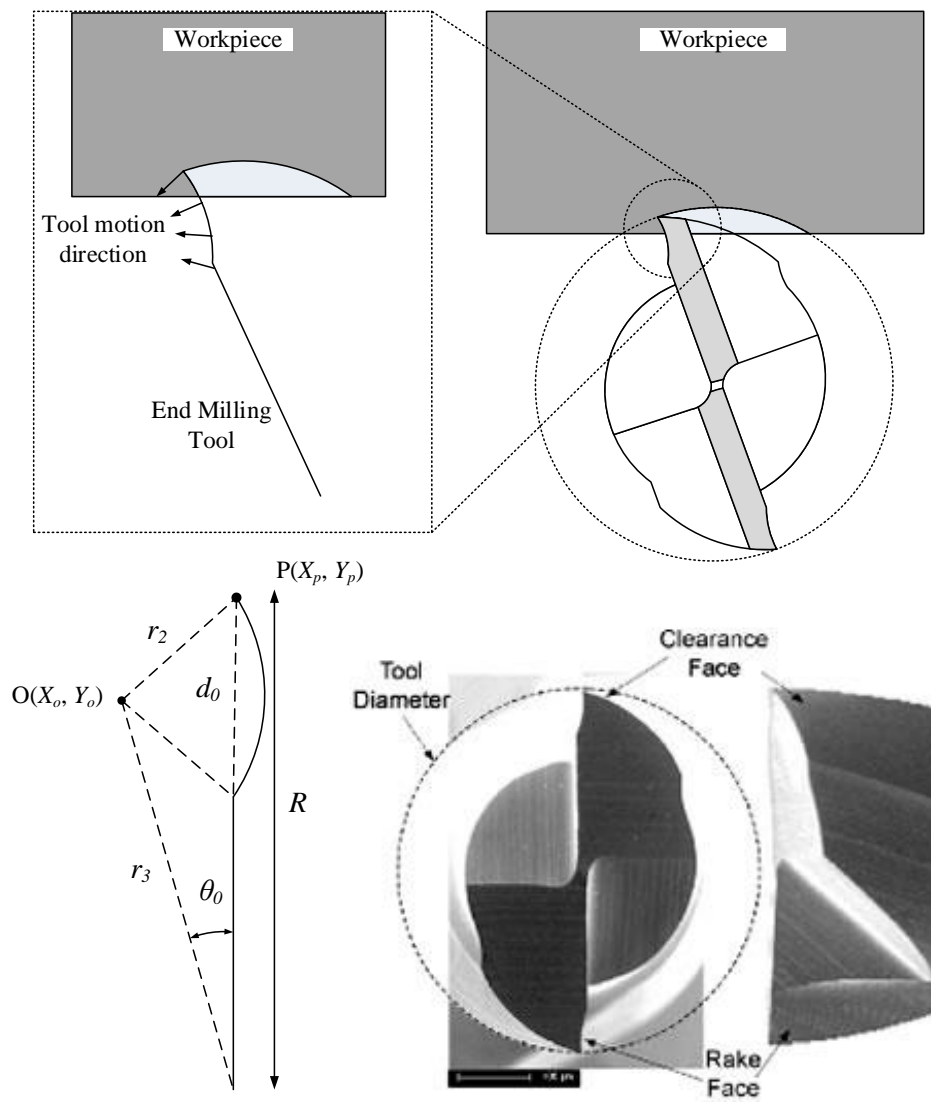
Detail of bottom view of end milling tool in up milling.
